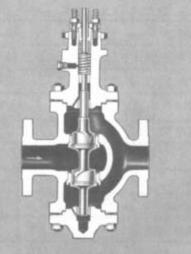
Double port Design "A" body with port guided V-Port valve plug.
